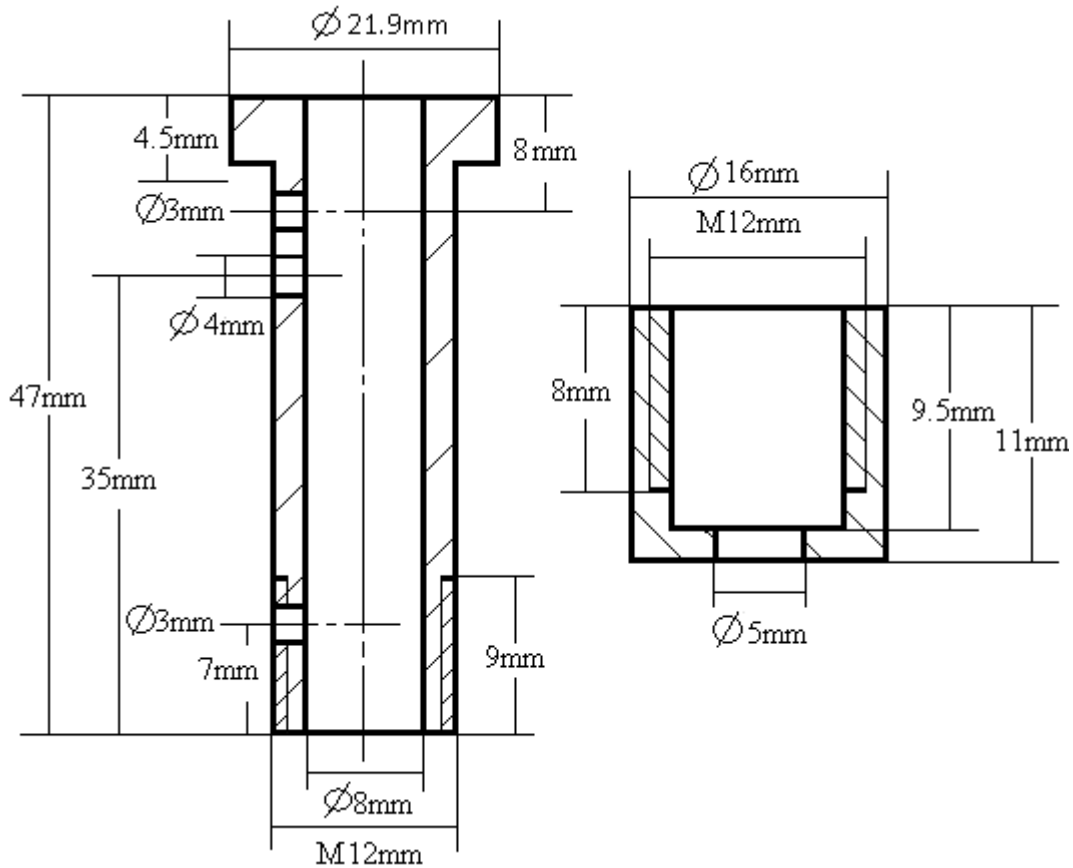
Schematic showing the design of the printhead housing and the nozzle adaptor.
